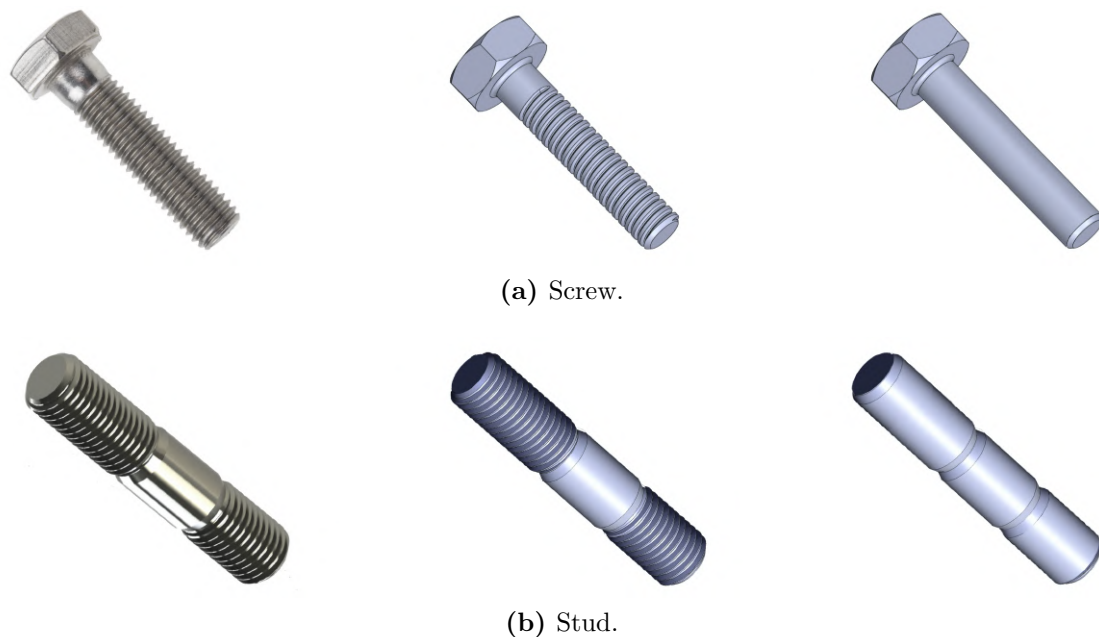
Examples of real threaded parts compared with a model with threads and a model with no threads.
